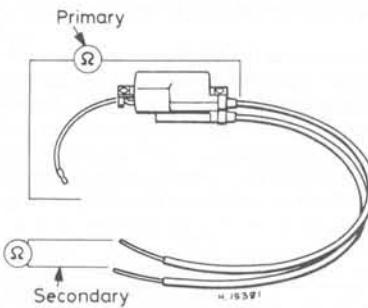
Ignition coil test – CM125 C and CD125 T
